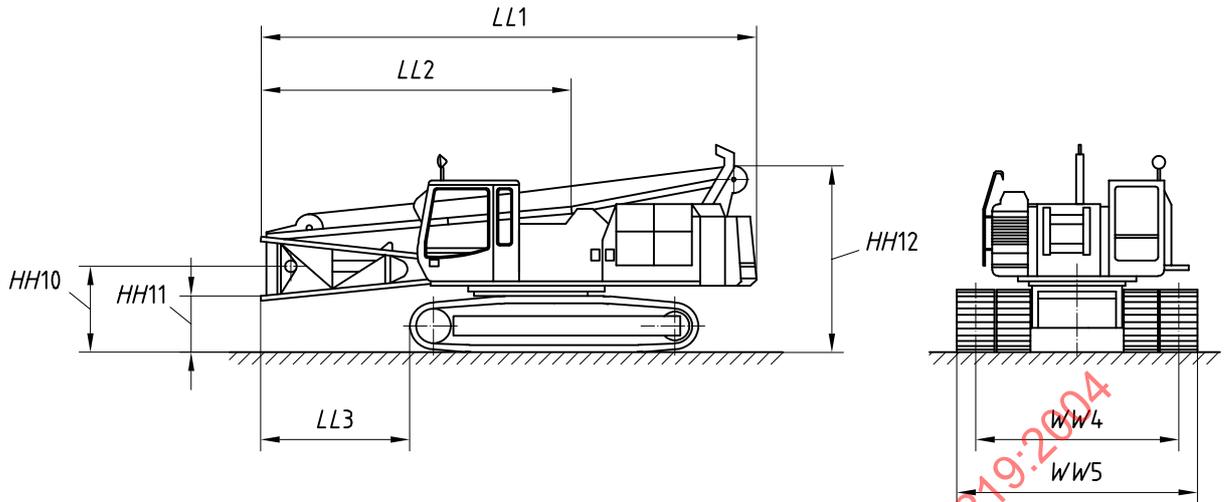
Transport and shipping dimensions of crawler-type machine with basic equipment
